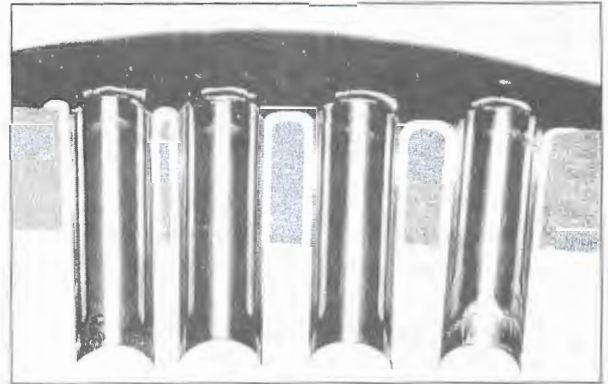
Macrosection of the welded joints of tube plate (VT1-0) with tubes (E125)
